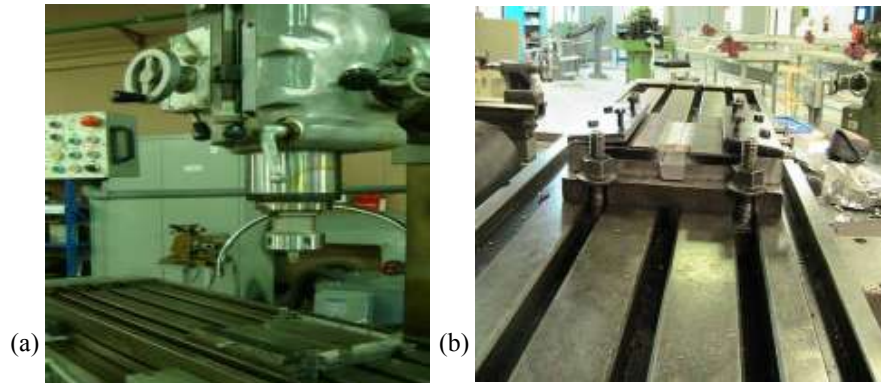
(a) Vertical Milling Machine with fixture and (b) Fixture
